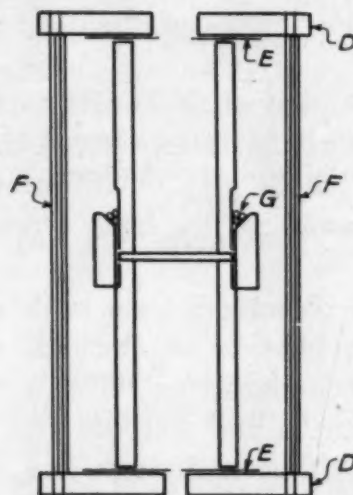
Assembly of Diffusion Disk and Holder, Ready to be Placed in Hydrogen Atmosphere for Welding.
